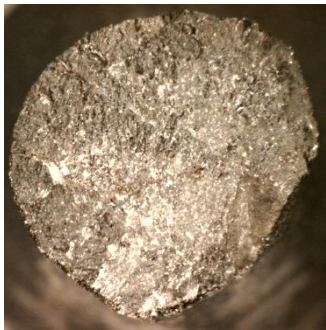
Fracture tensile surfaces taken using SEM: sample 9 (Y)
